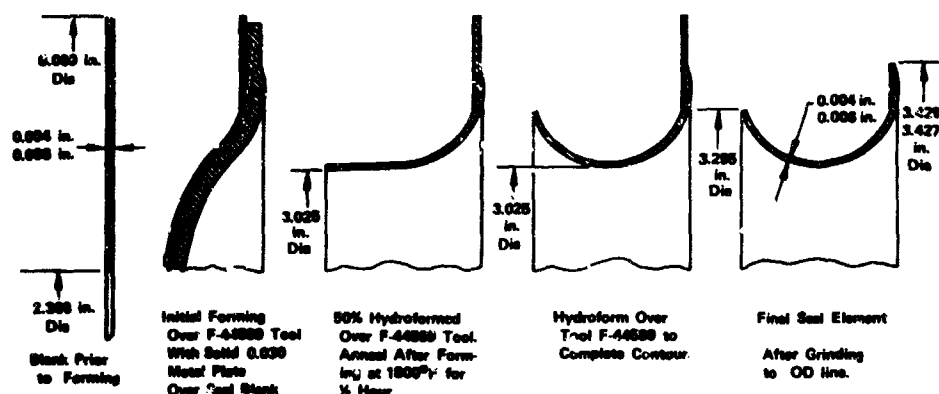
Fabrication of Preburner Fuel Valve Seal Element FD 39146
